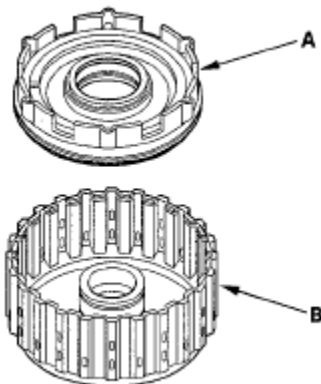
Identifying 1st/1st-Hold Clutch Piston And 1st/1st-Hold Clutch Drum
